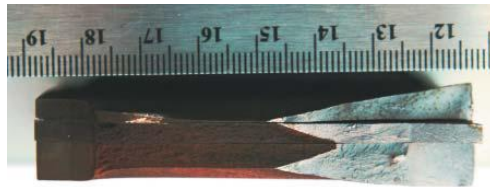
Tunnelling in an interrupted DWTT specimen [9].
